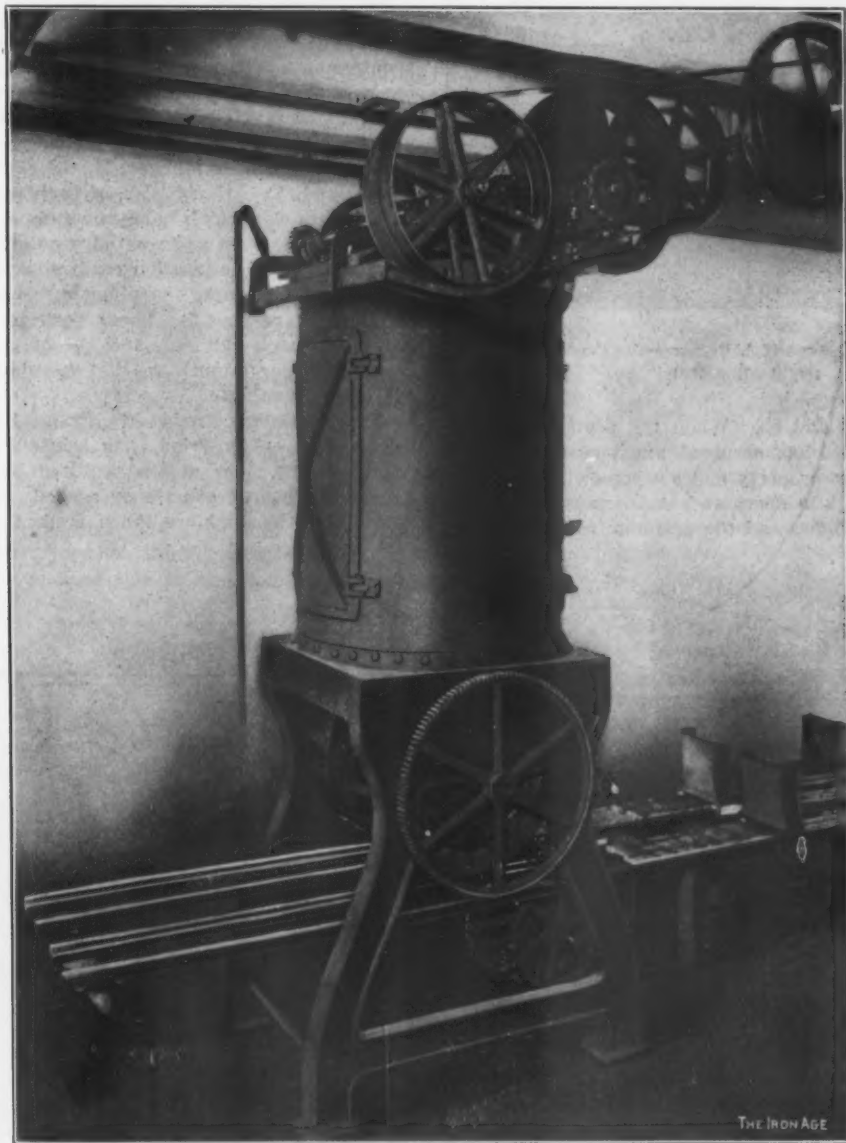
The Molding Mill, in which the Prepared Peat is Formed into Blocks.
